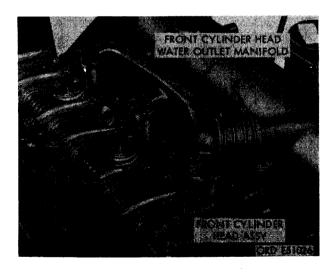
DISCONNECTING OR CON-NECTING FRONT CYLINDER HEAD WATER OUTLET MANIFOLD.
